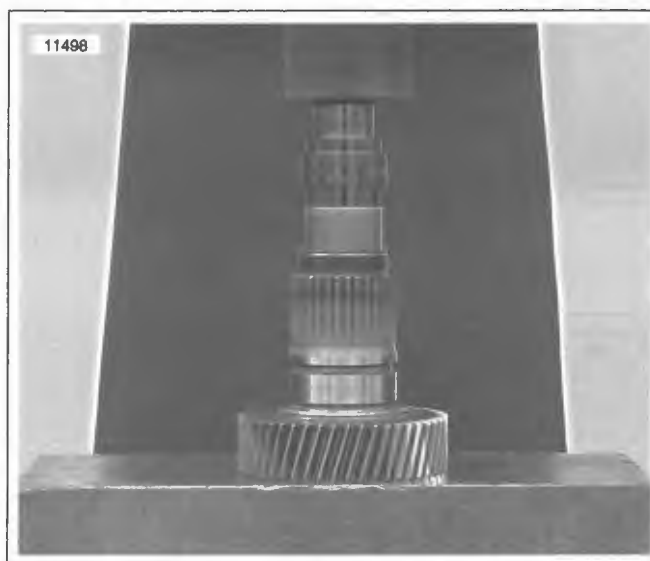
Installing Clutch Side Needle Bearing in Main Drive Gear
